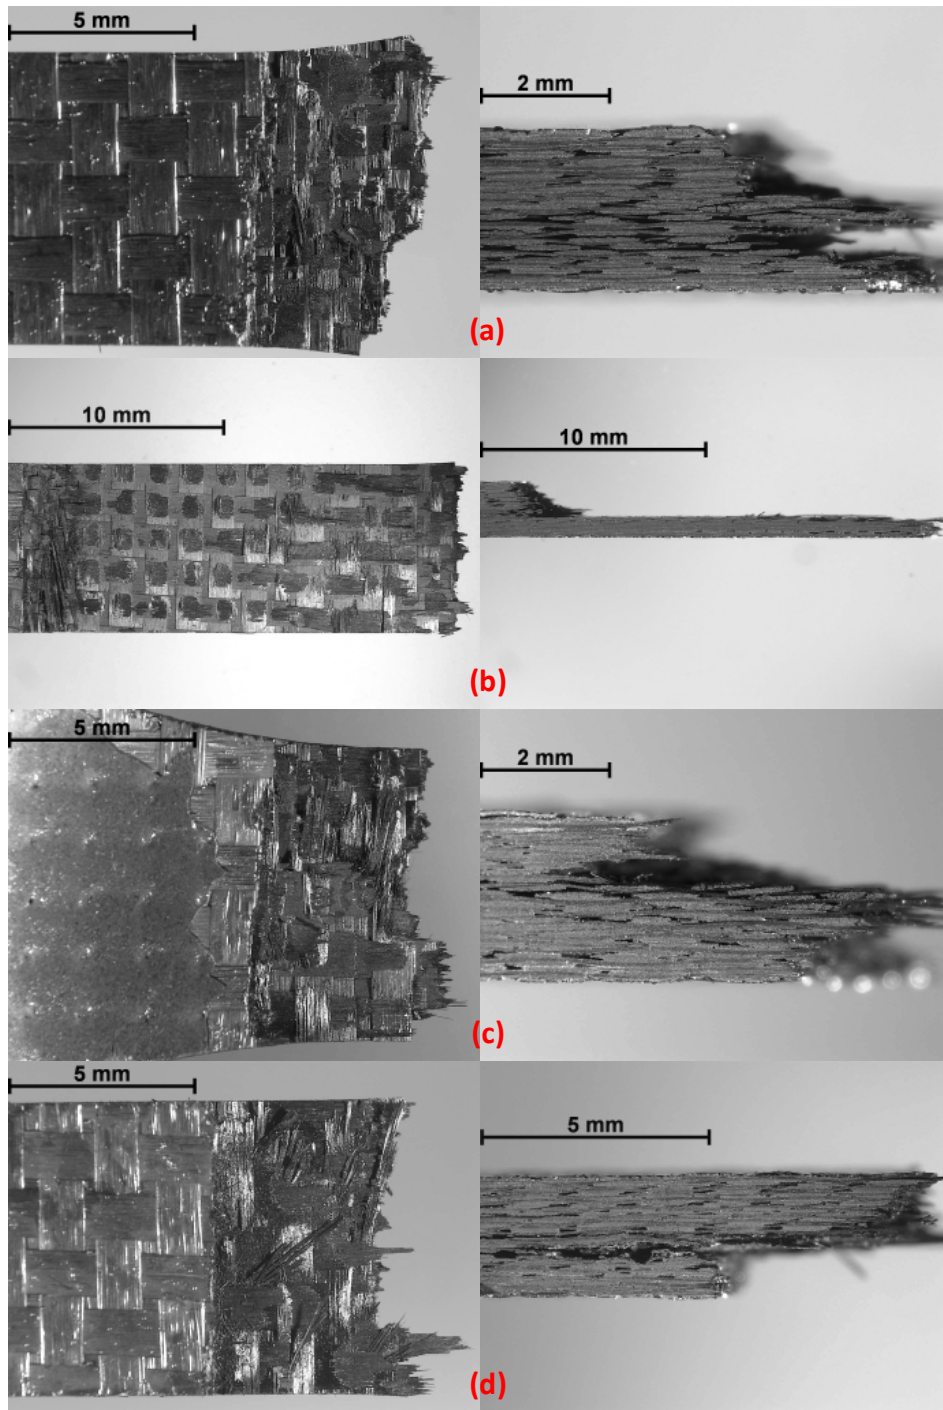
Fracture surfaces obtained in tensile tests of C/HYPR-SiC™ specimens (left: face-up; right: edge-on) – (a) virgin specimen; and specimens with prior heat treatments at (b) 1300°C for 40 h; (c) 1300°C for 100 h; (d) 1200°C for 100 h
